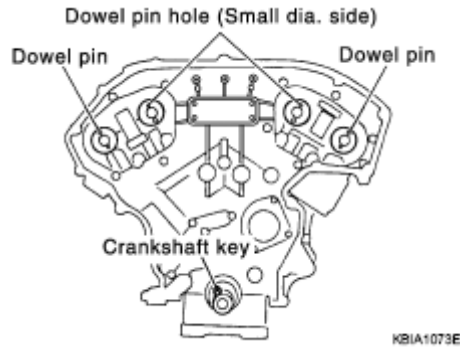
Identifying Dowel Pin Hole, Dowel Pin And Crankshaft Key Location
